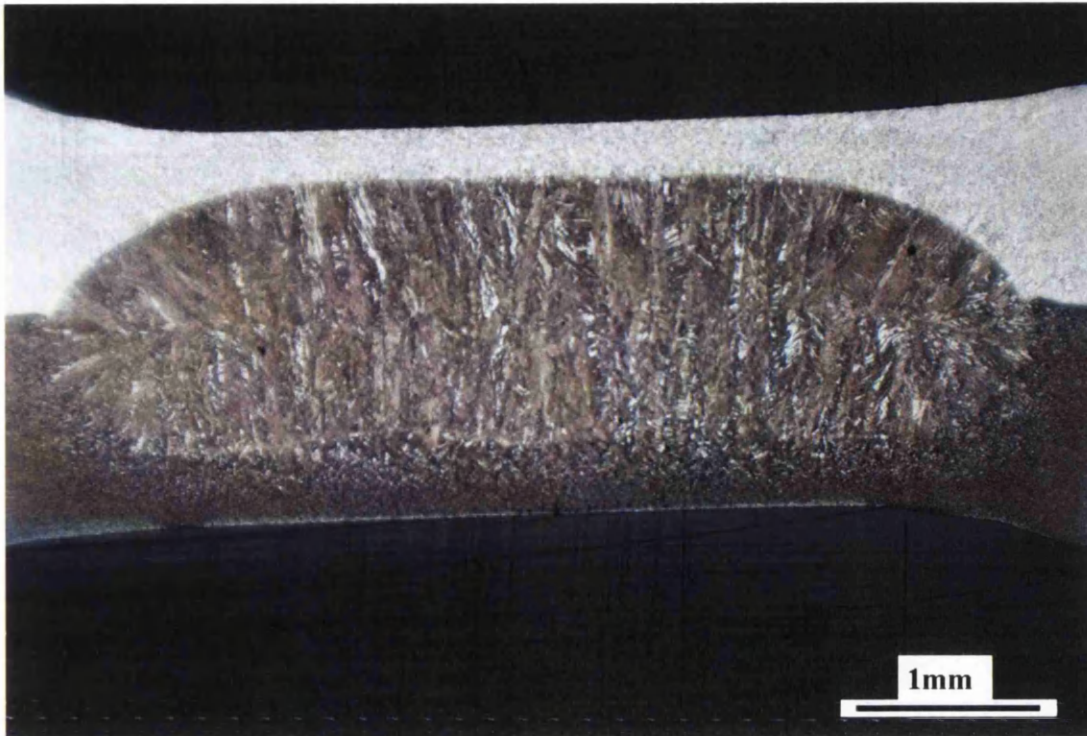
Macro of weld nugget formed between DP1000 and LC
